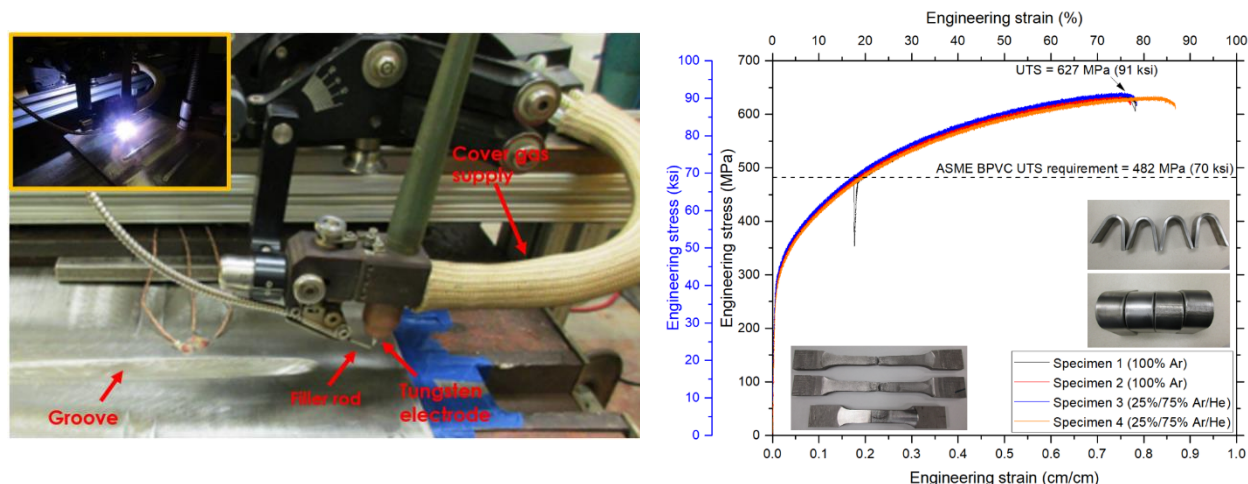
Welding configuration and qualification tensile and bend test results. (Left) The welding configuration. A CW-GTAW torch used for performing weld repairs. The electrode was tungsten, the filler rod was 308L stainless steel, and the cover gas was a mixture of 75% He + 25% Ar. (Right) CW-GTAW joint transverse tensile curves and bend tests for different cover gases.
